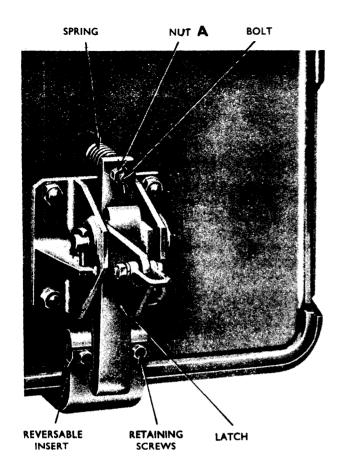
Dipper Trip Latch Adjustment for Straight Boom Dragshovel - Front Opening Dipper.
